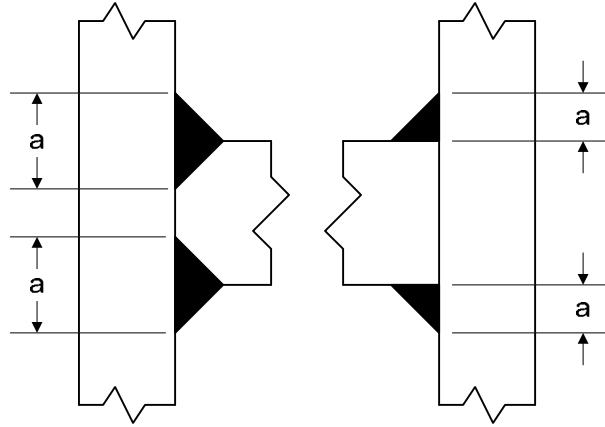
Dimension "a" For Partial Penetration and Fillet Welds
